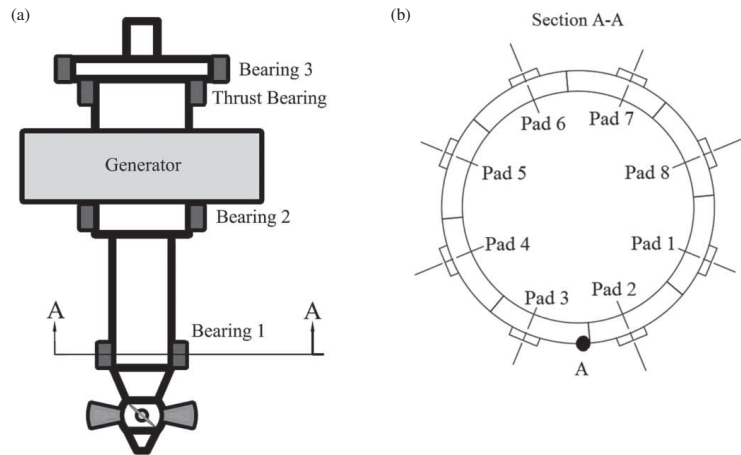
Arrangement of Porjus U9 bearings (a); and a sketch of the pads on bearing 1 (b), (Simmons, 2013)
